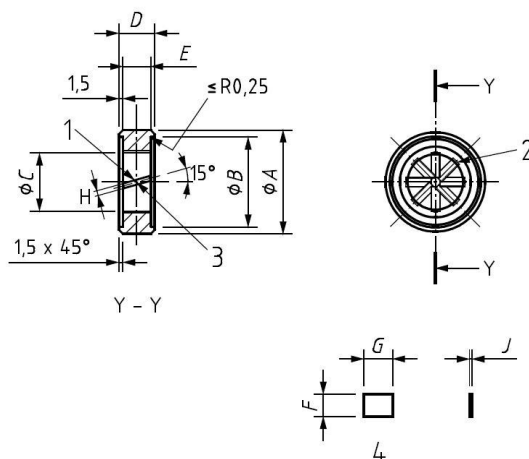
Body of a threaded type disturbance generator, with dimensions as set out in Table A.2
